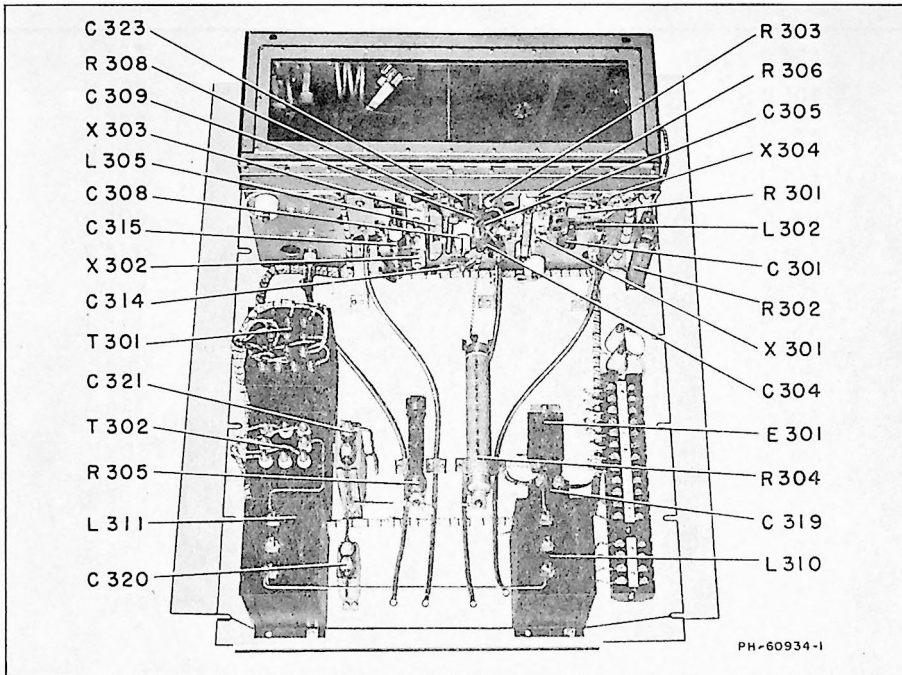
1st R-F Amplifier Chassis (Front View, Cover Removed)
